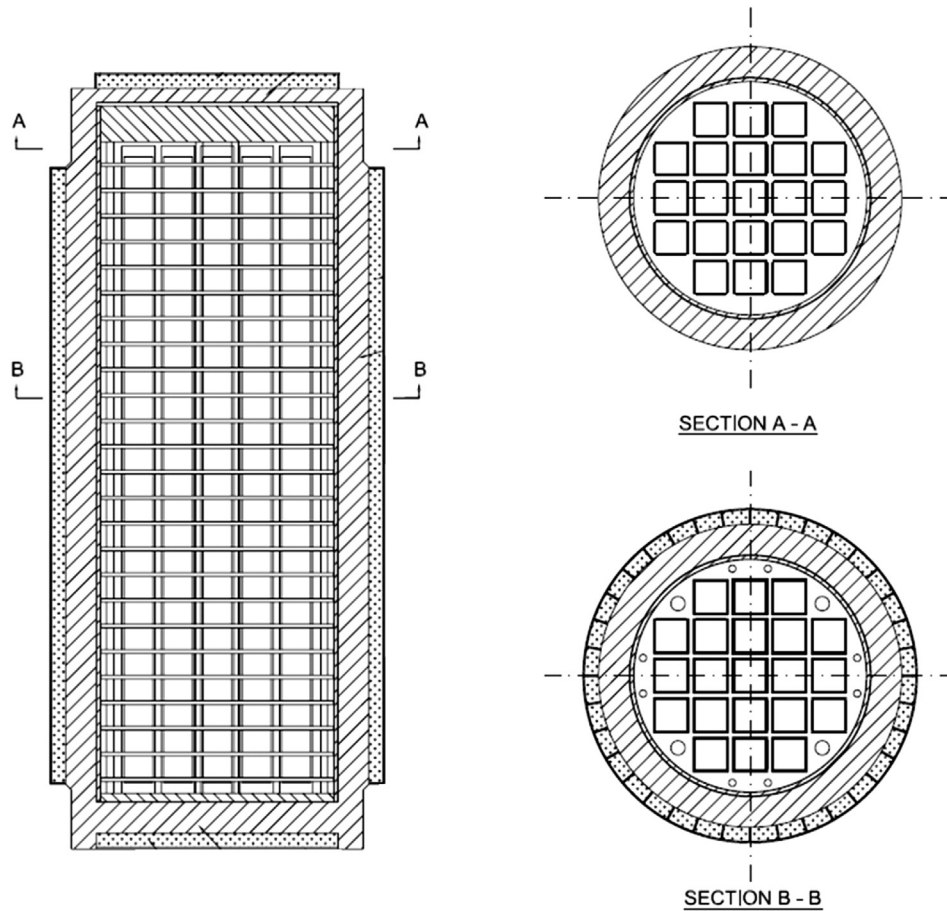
Concept drawing of a dual-purpose metal cask without impact limiters.
